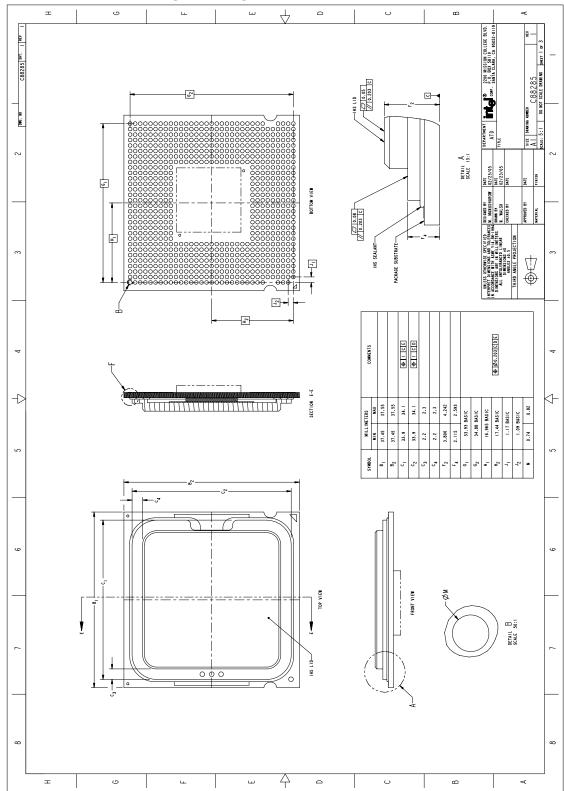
Processor Package Drawing Sheet 2 of 3
